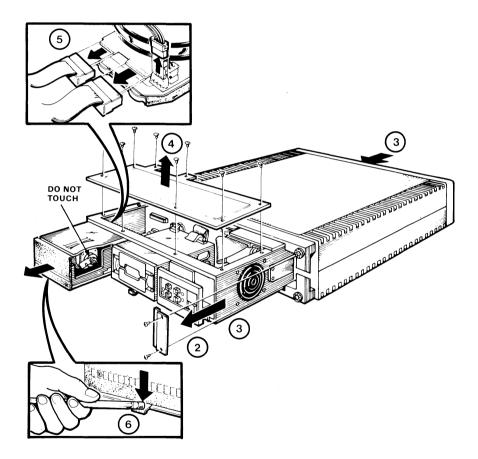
RD5n Removal (RD51 Disk Drive Shown)
